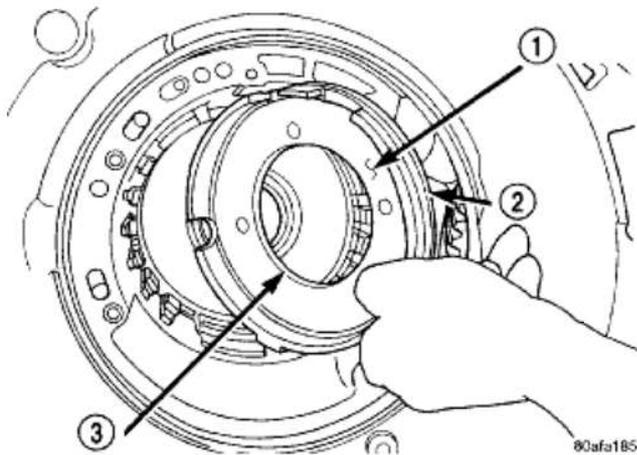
Identifying Low/Reverse Clutch Piston & Bonded Seals
